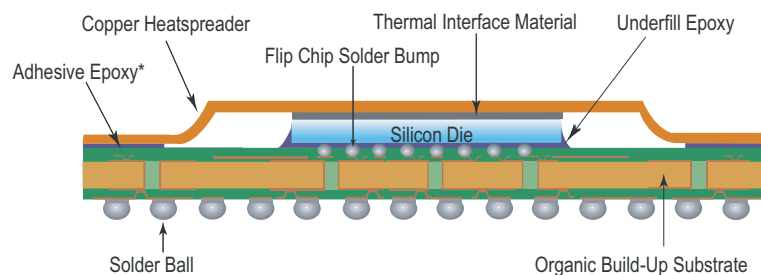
Flip-Chip BGA Package With Type II Lid
